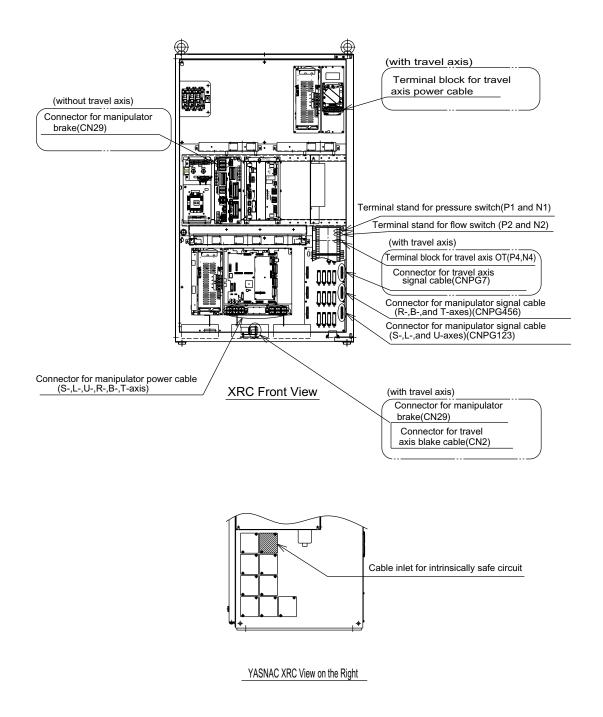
Connection of the Power Supply Cables and Intrinsically Safe Cables
